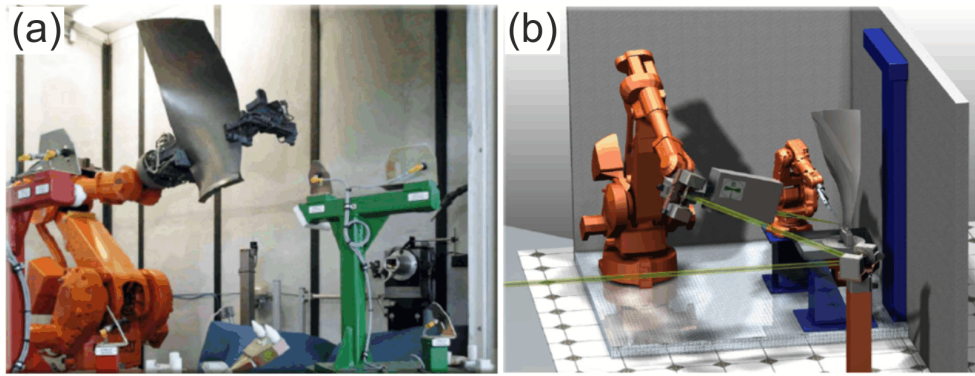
Robotic control of the LSP process. (a) Part is carried by robotic arm and moved through a static laser beam. (b) Part is fixed to a positioner while laser beam is delivered via advanced beam guiding system mounted to the robot [103].
